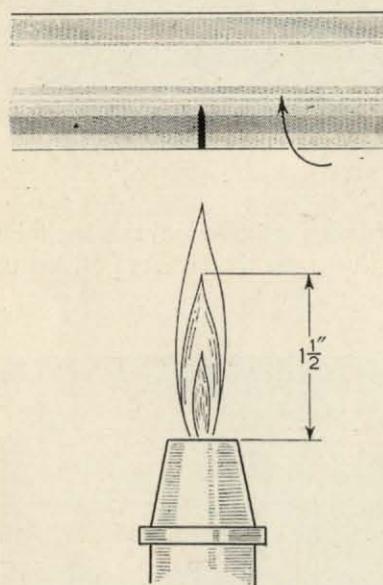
SOFT, POINTED FLAME FOR CUTTING LARGE-DIAMETER TUBES
